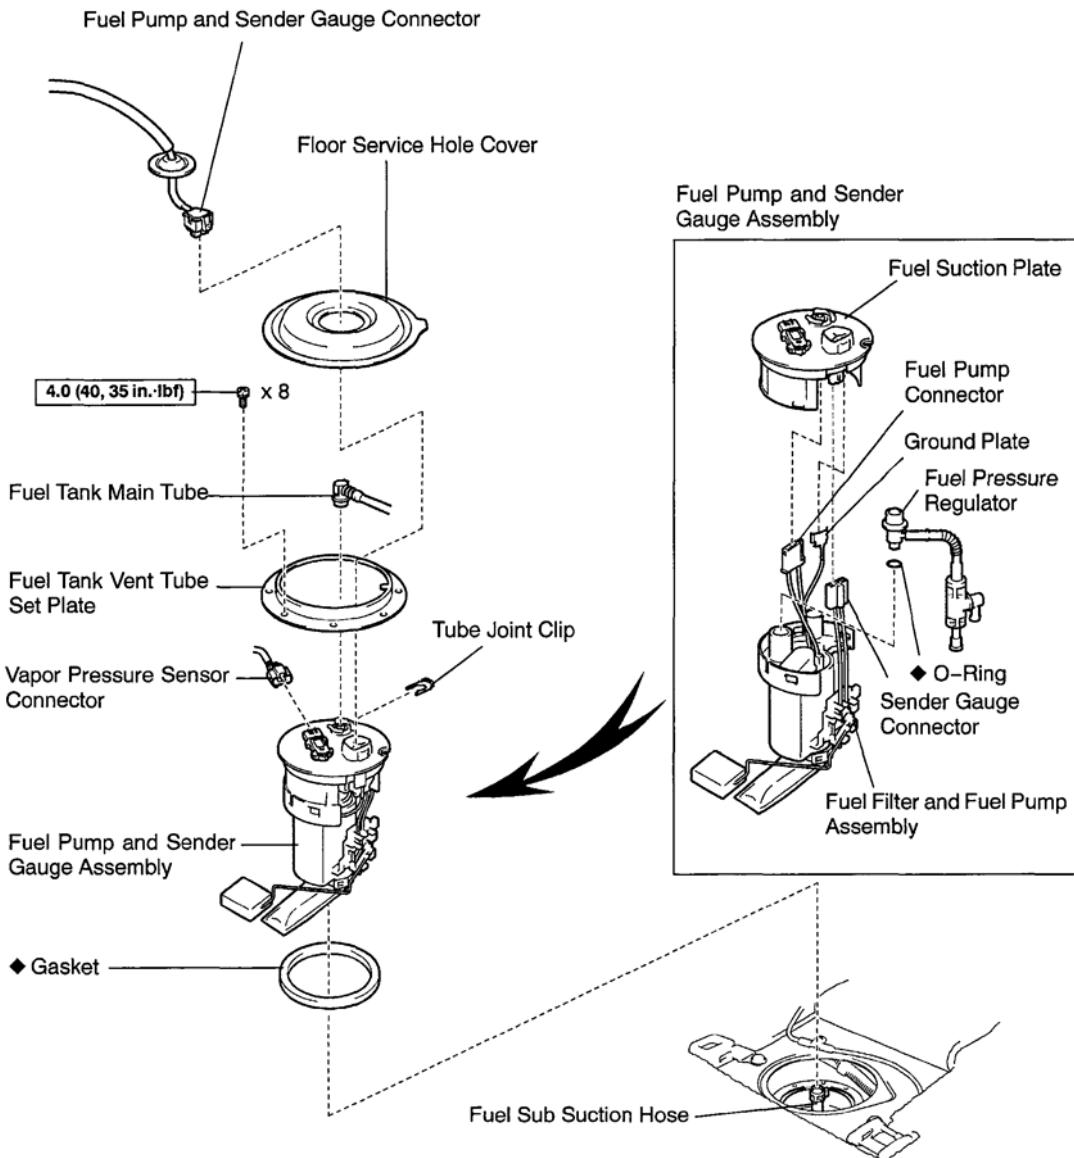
Identifying Fuel Tube Joint, Fuel Suction Plate, Fuel Pump Tube, Clip & O-Ring
